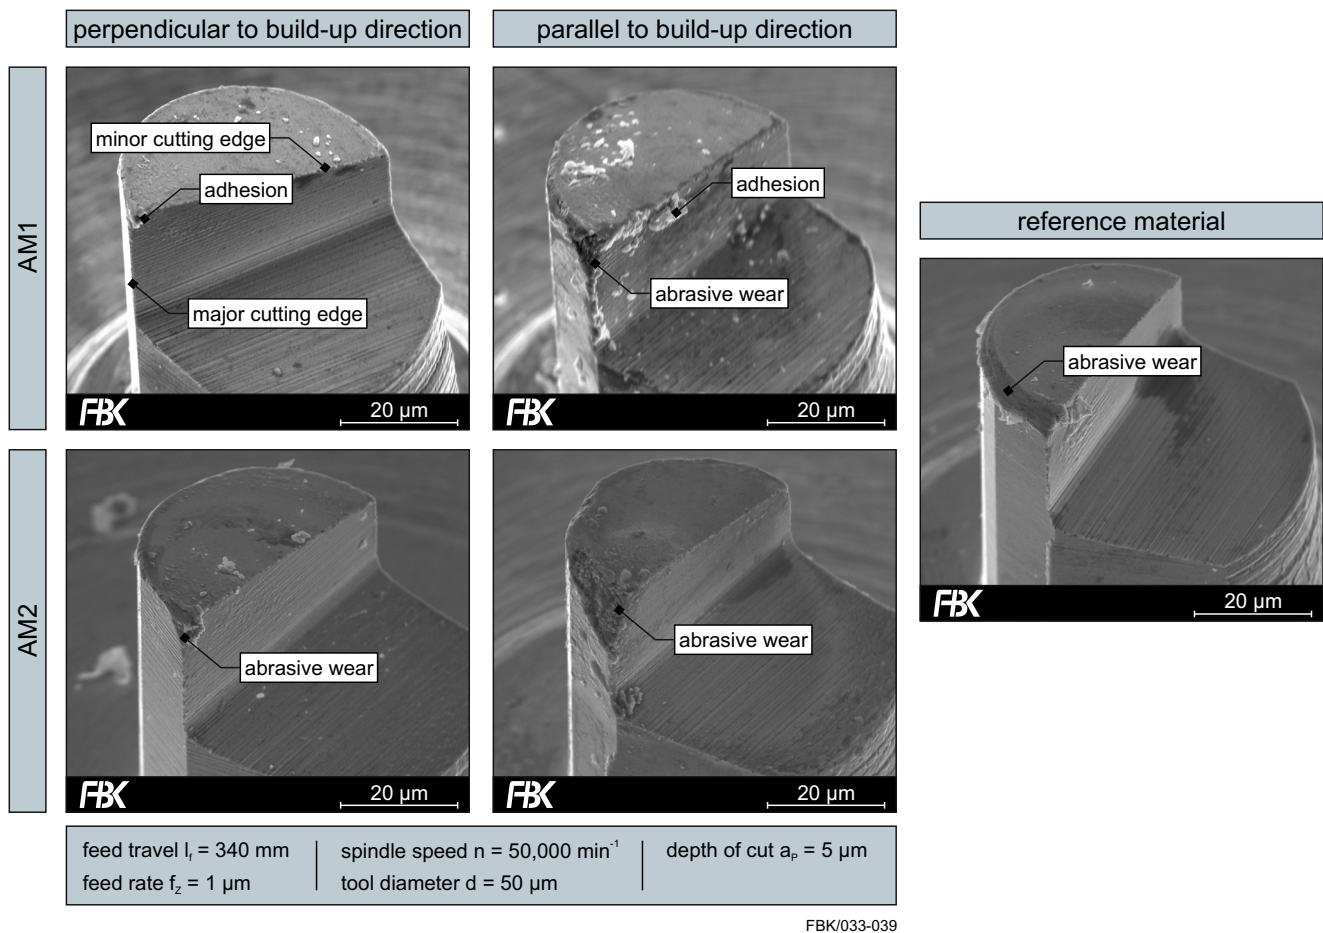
Representative tool wear of micro end mills after machining AM1, AM2 with feed direction perpendicular and parallel to the build-up direction, and reference material
